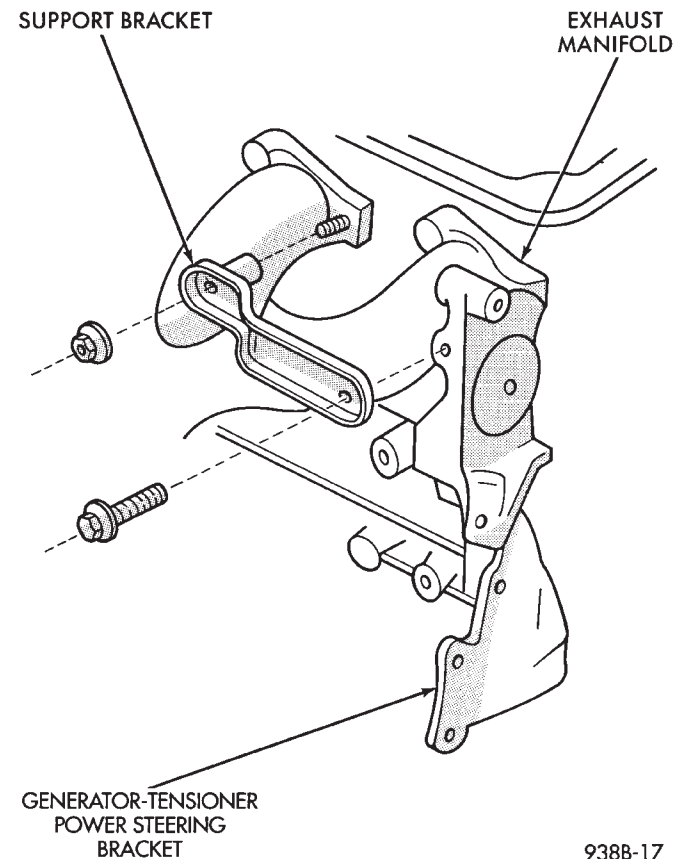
Support Bracket for Generator Tensioner Power Steering Bracket
